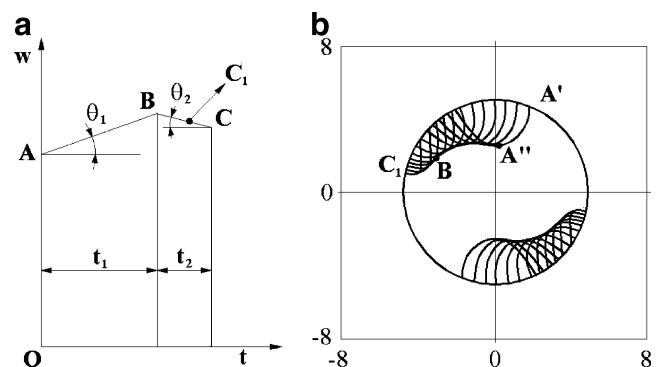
a Configuration of the grinding wheel and b flute shapes of the end mill
